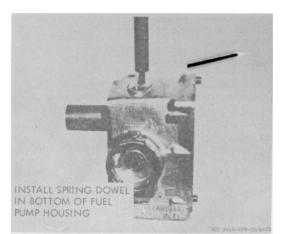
Spring dowel installation in bottom of fuel pump housing.
